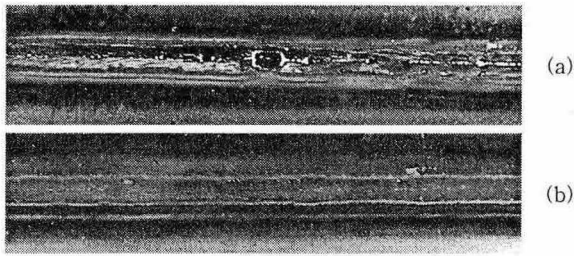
Weld bead surfaces for CO<sub>2</sub> LASER-TIG hybrid welding with different jigs ; (a) With screw type jig, (b) With roller type jig
